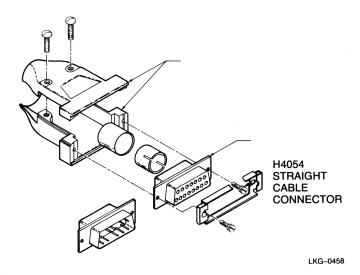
H4054 Transceiver Cable Straight Connector Kit
